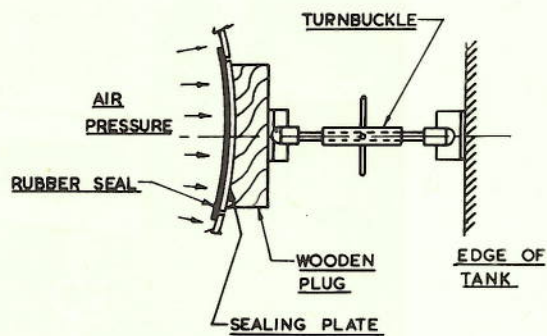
TYPICAL CUT-OUT IN PANEL OF PLANE LOADING FRAME
